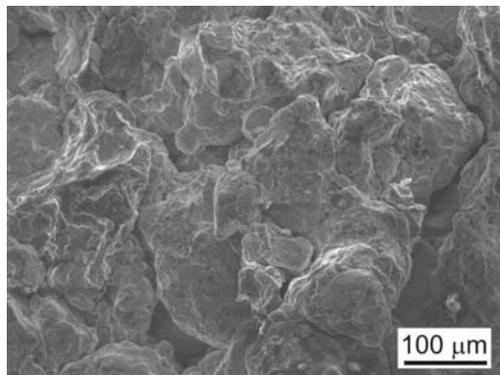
Fracture surface of specimens after pressing at 400 MPa.
